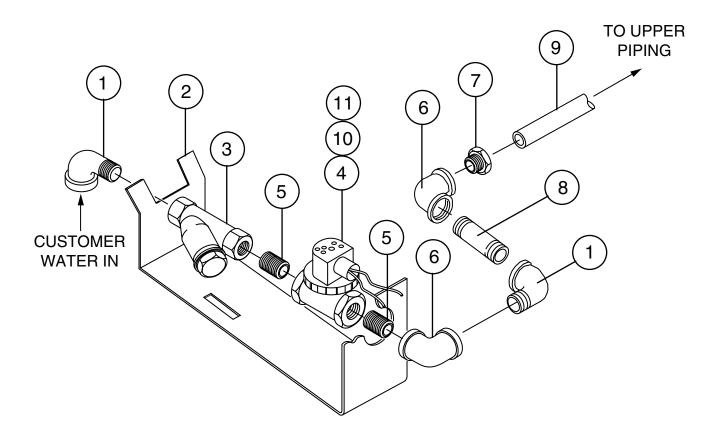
D-H1/D-LF Lower Fill Piping Assembly
